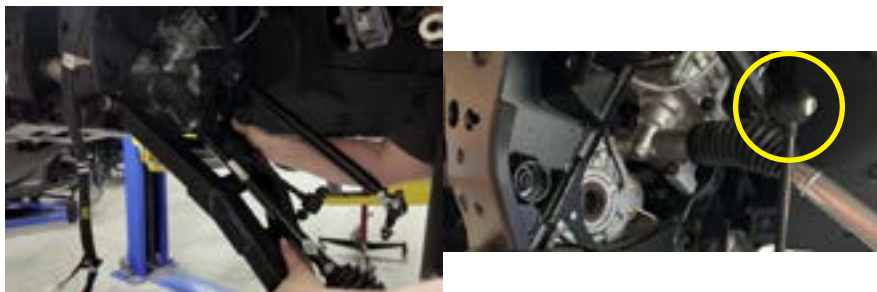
& FIG 13 - Install Thumper Fab Lower Control Arm and replace Sway Bar Upper Bolt
